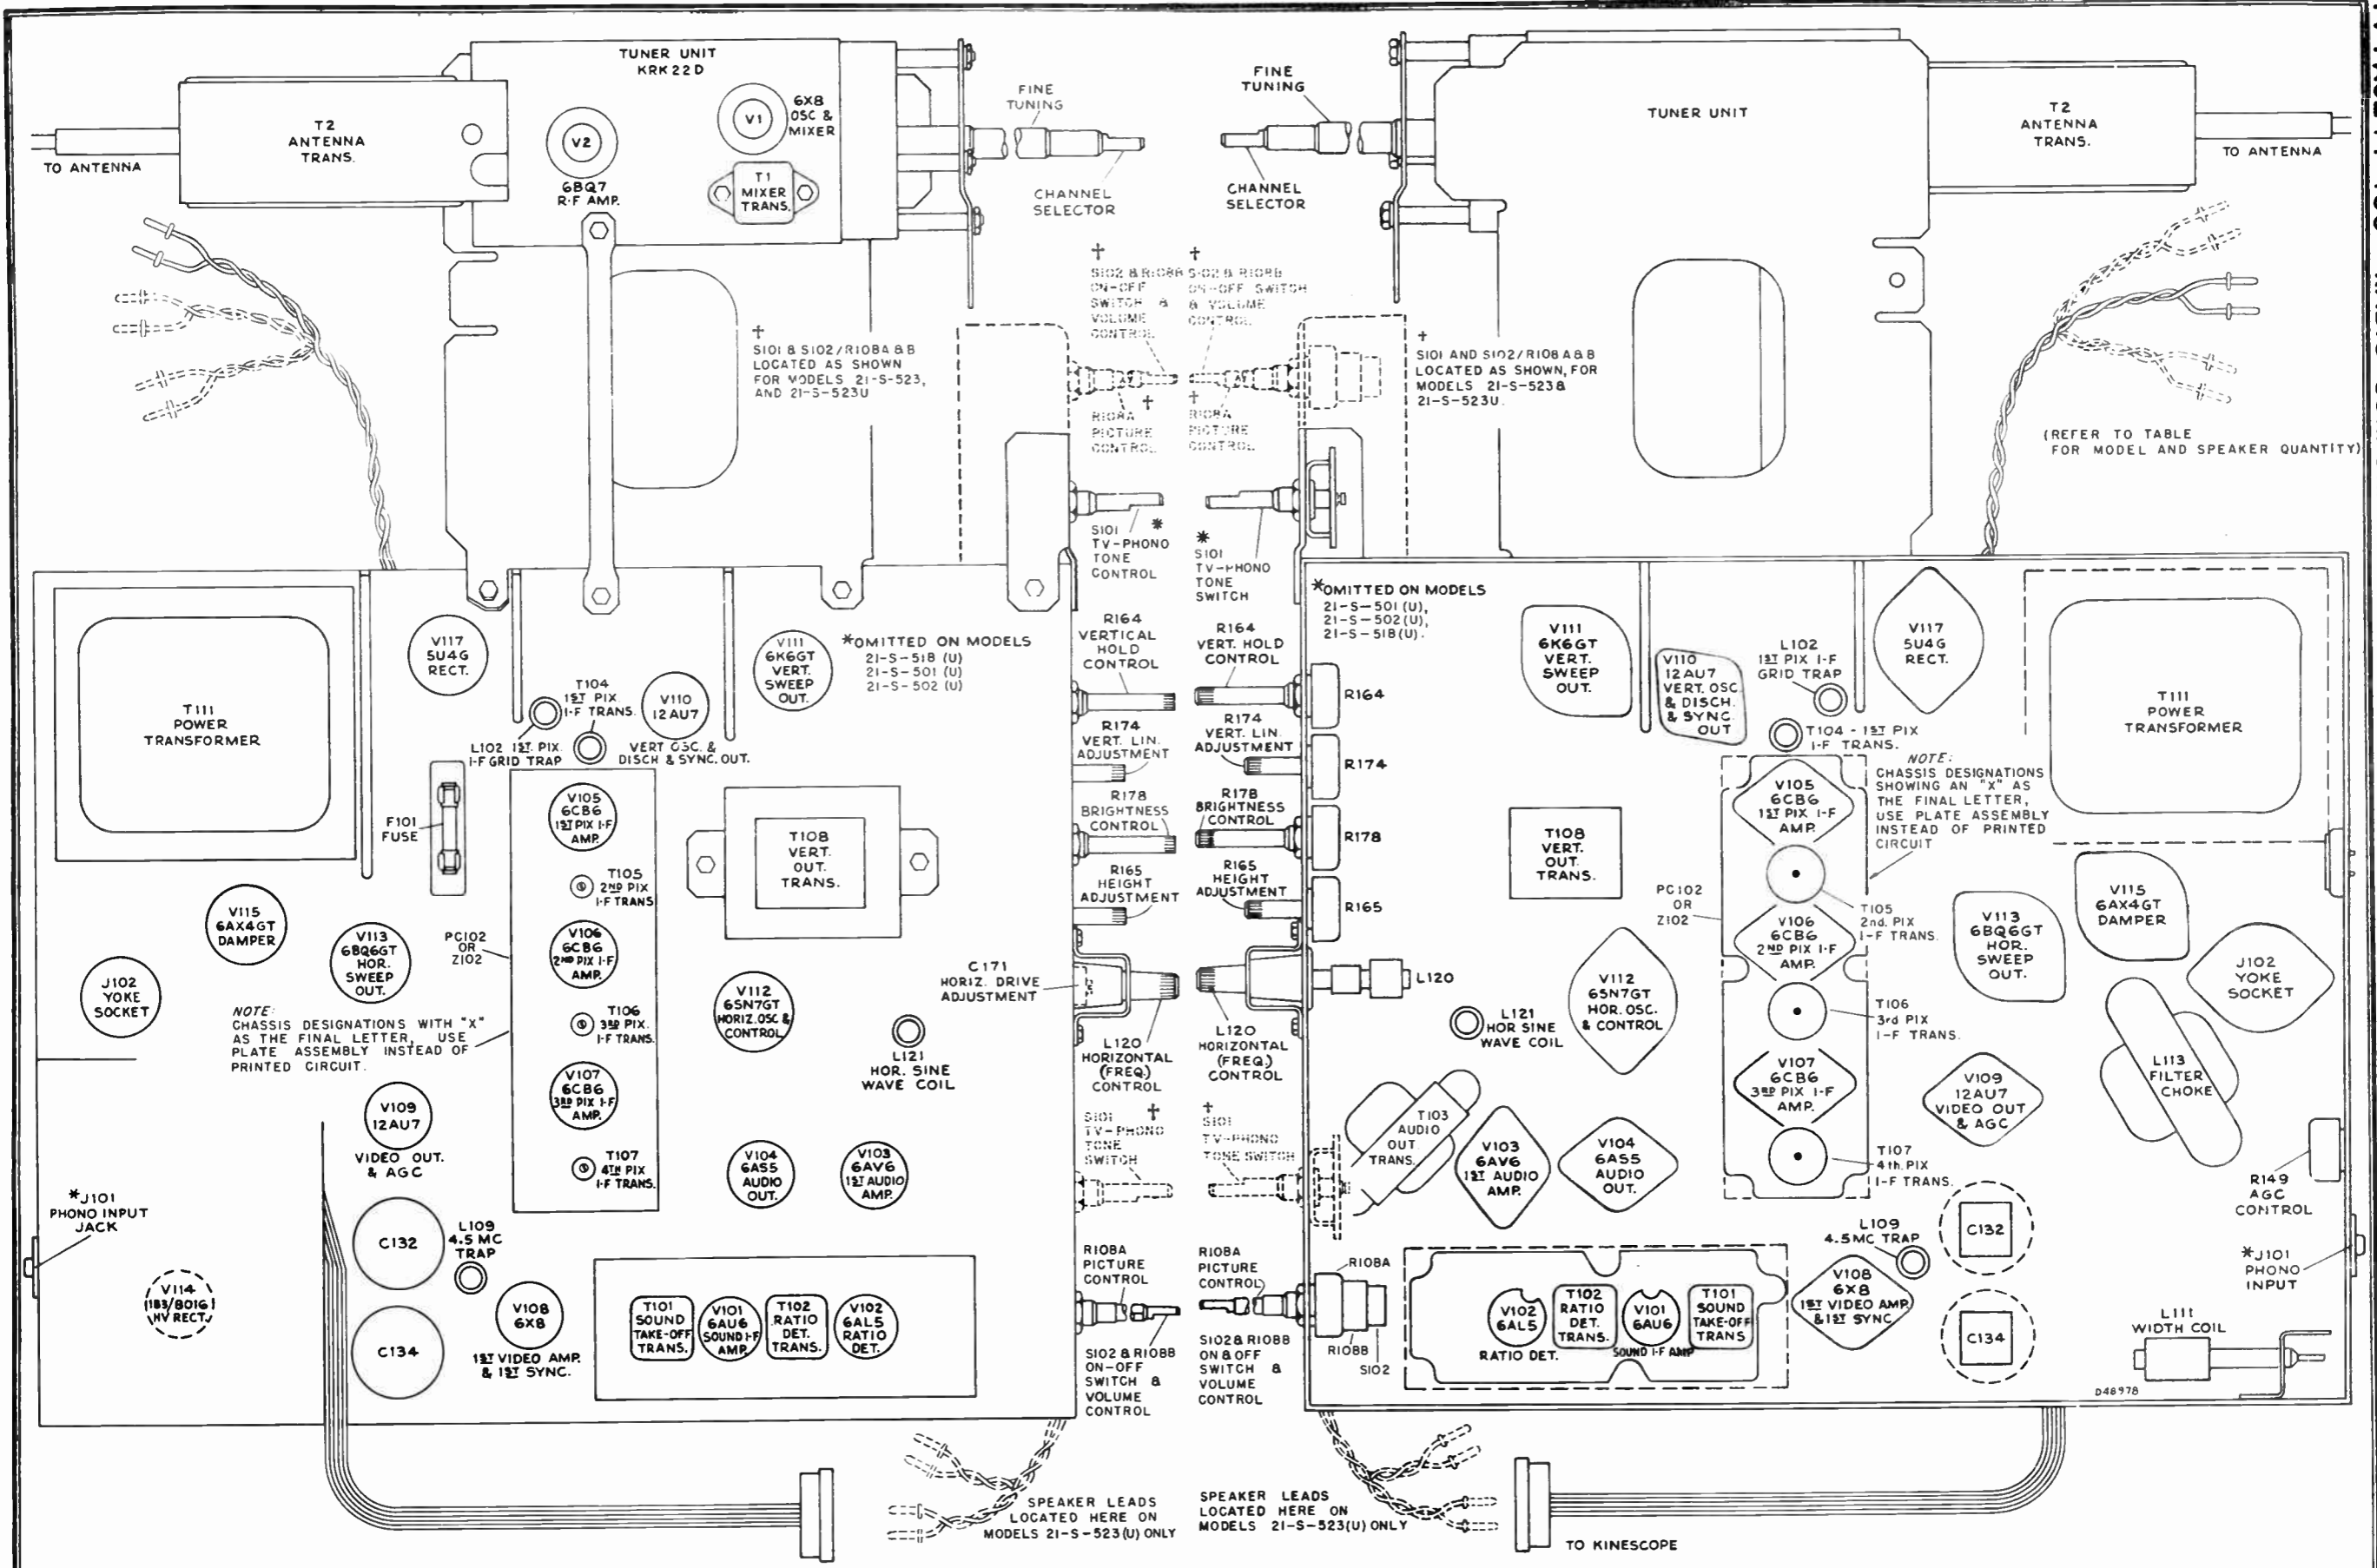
Chassis Top View (shown with KRK22D Tuner)
